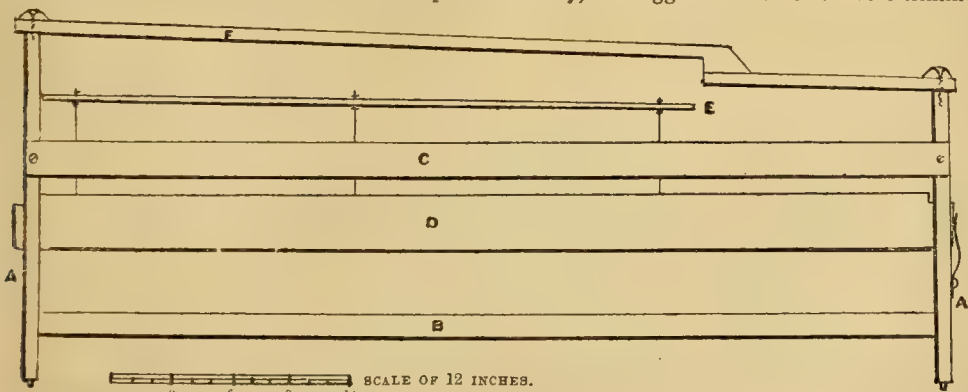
PIANOFORTE ACTION FRAME SHOWN IN ELEVATION, RECONSTRUCTED, AND WITH DAMPER RAIL ADDED.
